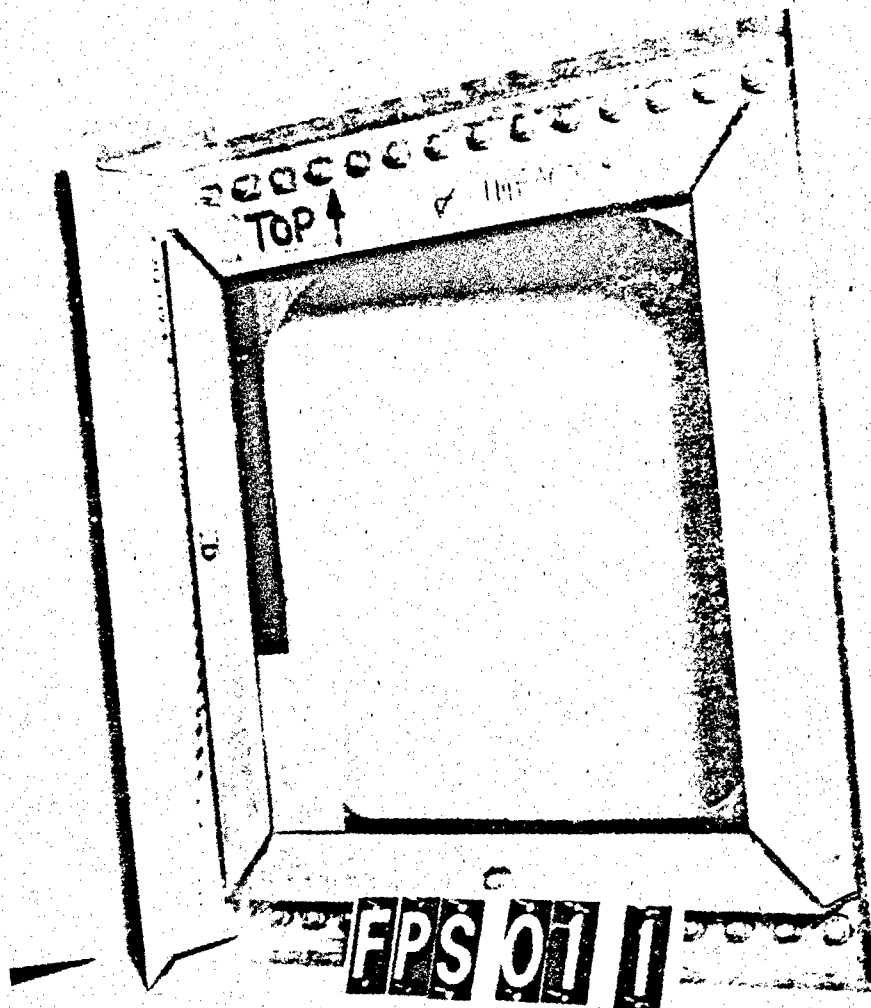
Aluminum Frame Holding Specimen Panel - Front View
